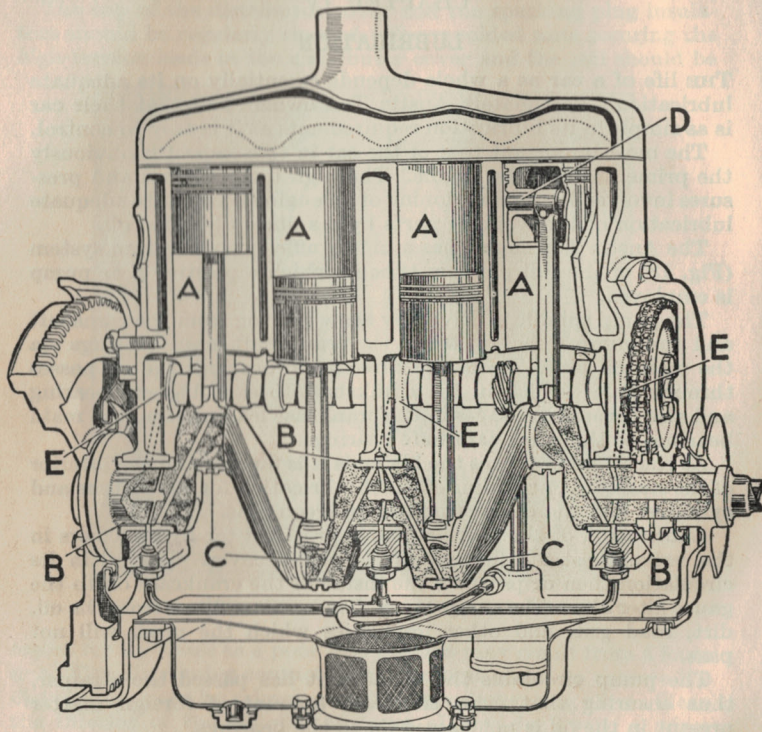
A SECTIONAL VIEW OF THE AUSTIN TEN ENGINE SHOWING THE CHIEF BEARING SURFACES REQUIRING LUBRICATION
